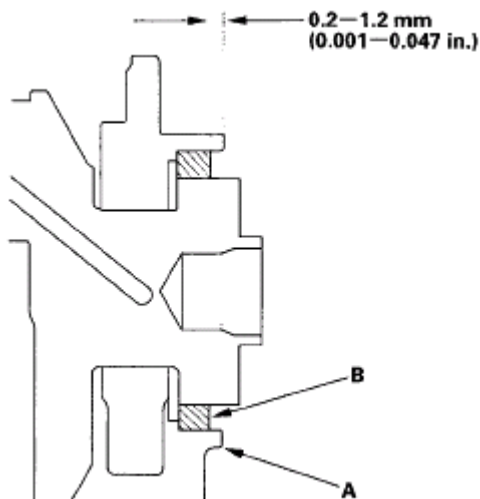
Measuring Distance Between Engine Block & Crankshaft Oil Seal
